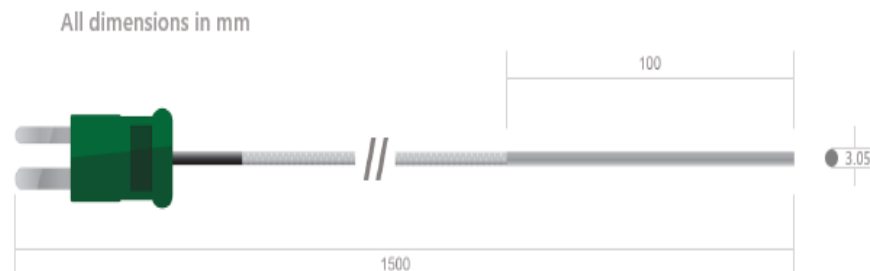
Dimensions of the K-type Thermocouples used for the investigation.
